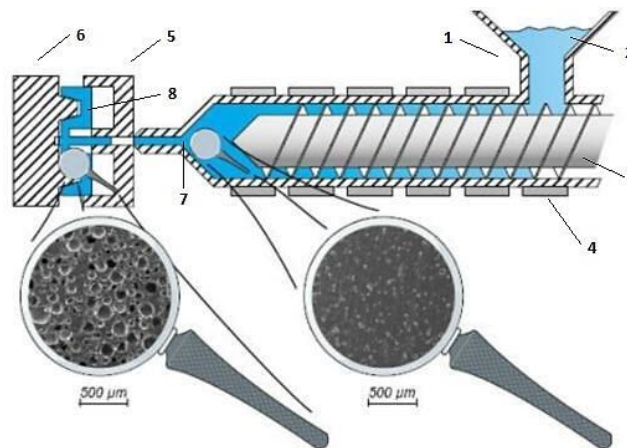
Schematic depiction of the injection press and its main components: 1 – feed hopper, 2 – granulate, 3 – reciprocal screw, 4 – heating, 5 – a stationary half of a mould, 6 – a moving half of a mould, 7 – melt, 8 – compact [15].
